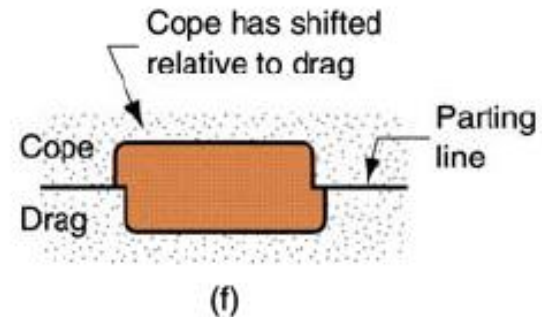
Common defects in sand castings: (f) mold shift
